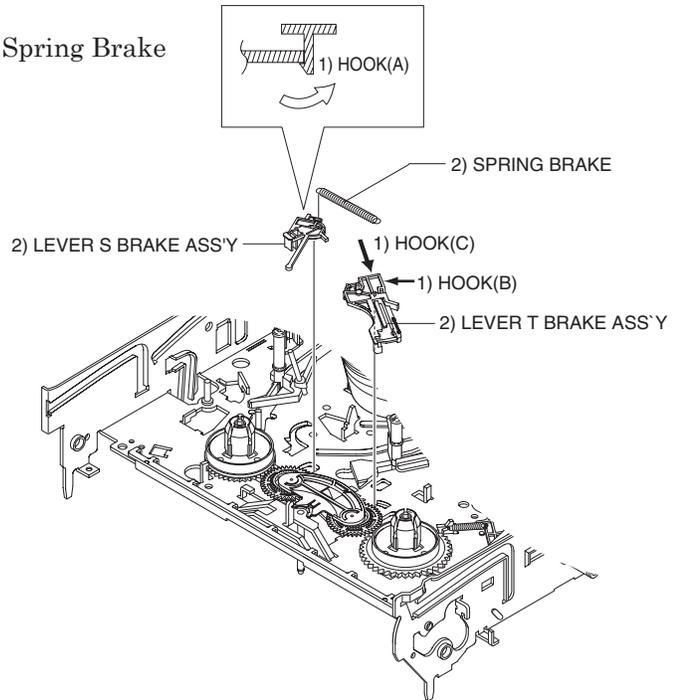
Lever Brake S, T Ass'y Removal
